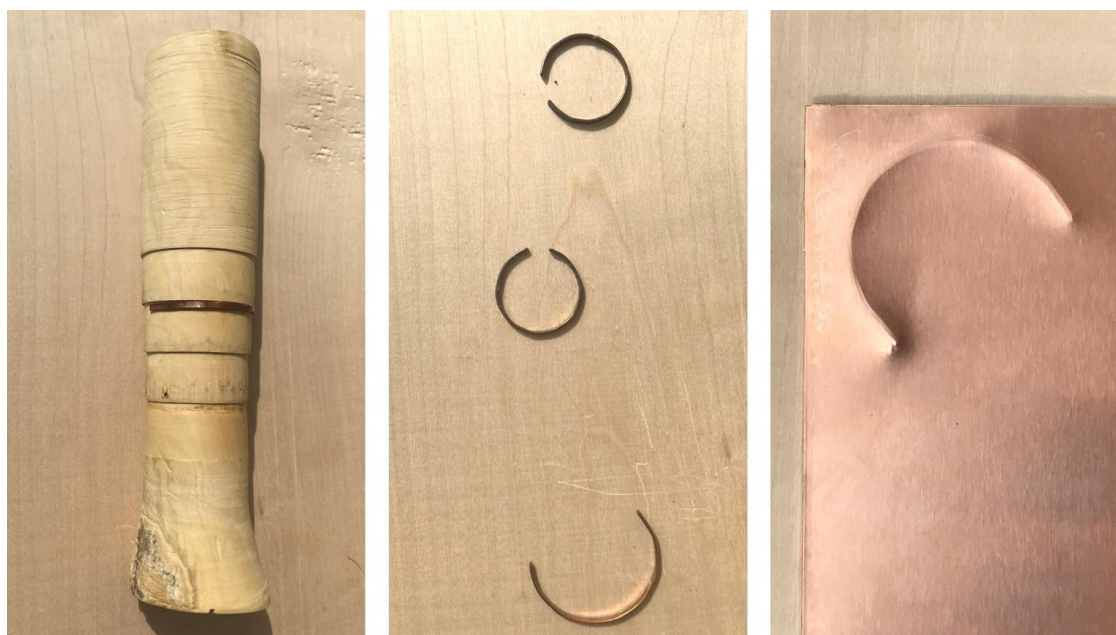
This is an example of the template made with the lathe, of circles obtained by bending iron rods, and of a matrix produced by hammering the iron in a copper plate.
